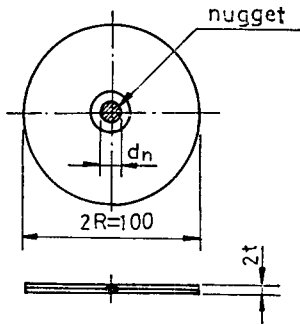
Shapes and dimensions of specimen by spot welding
